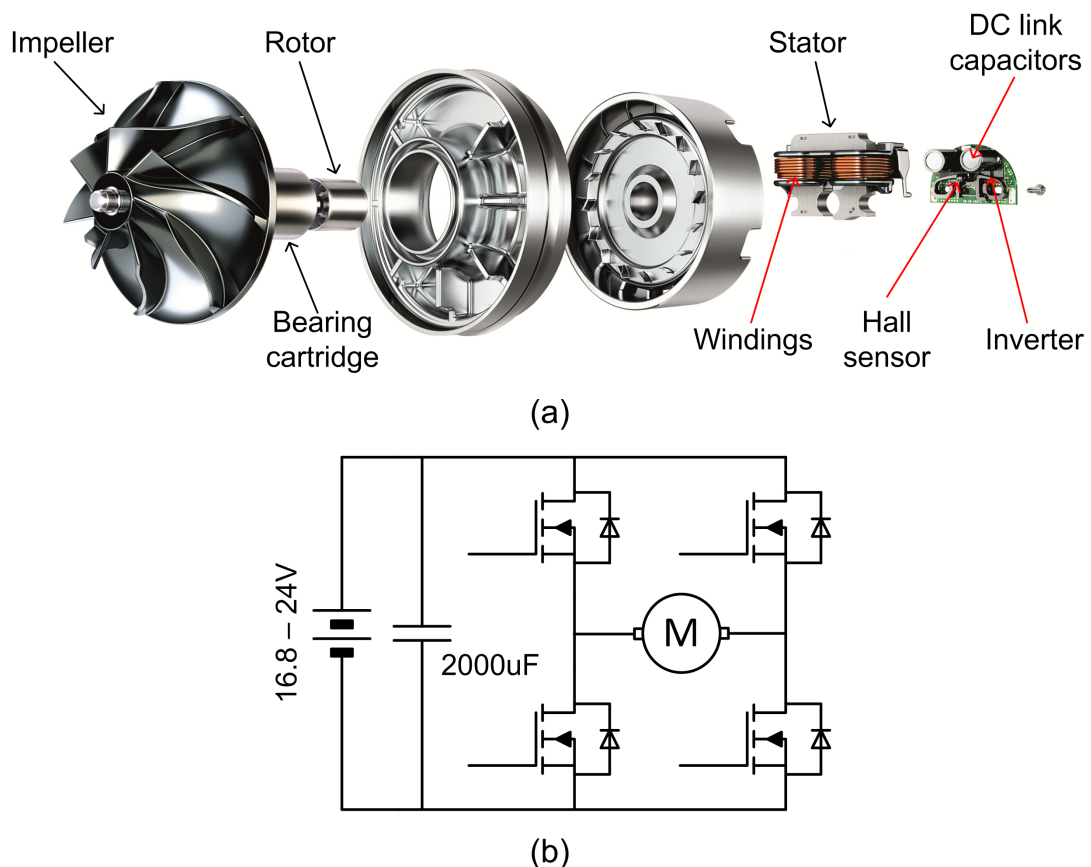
The 200W 100kRPM BLDC motor drive (a) exploded view (b) simplified circuit diagram
